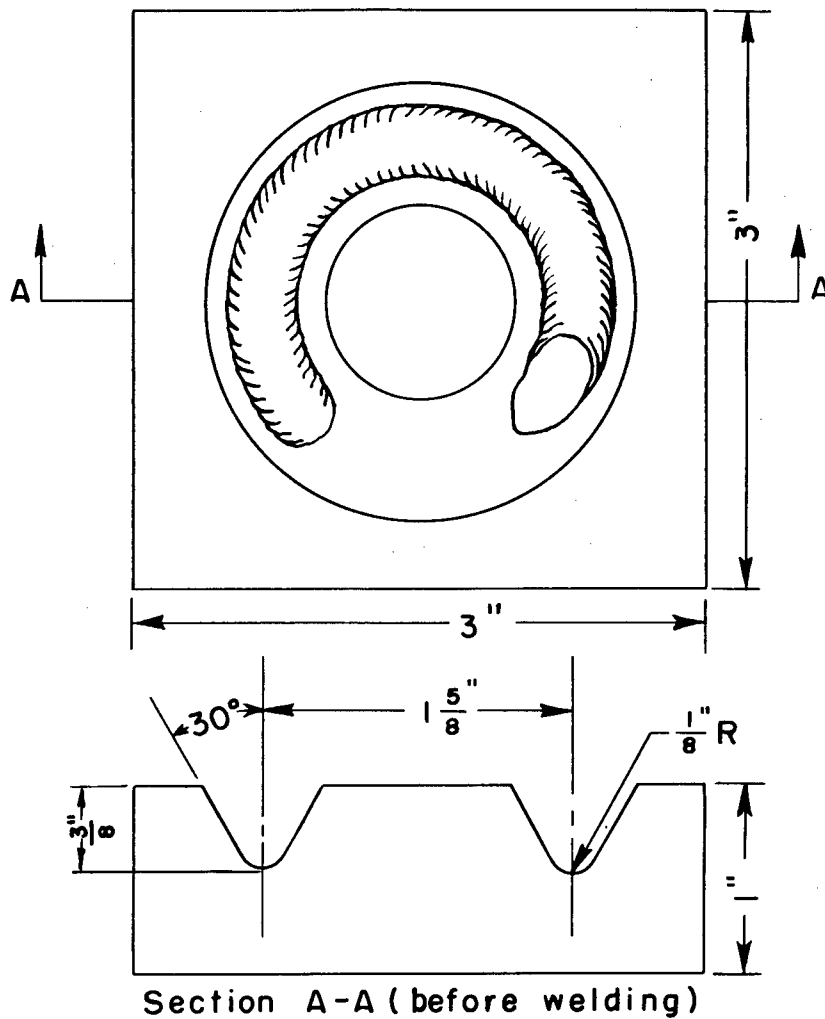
CIRCULAR-GROOVE TEST SPECIMEN
